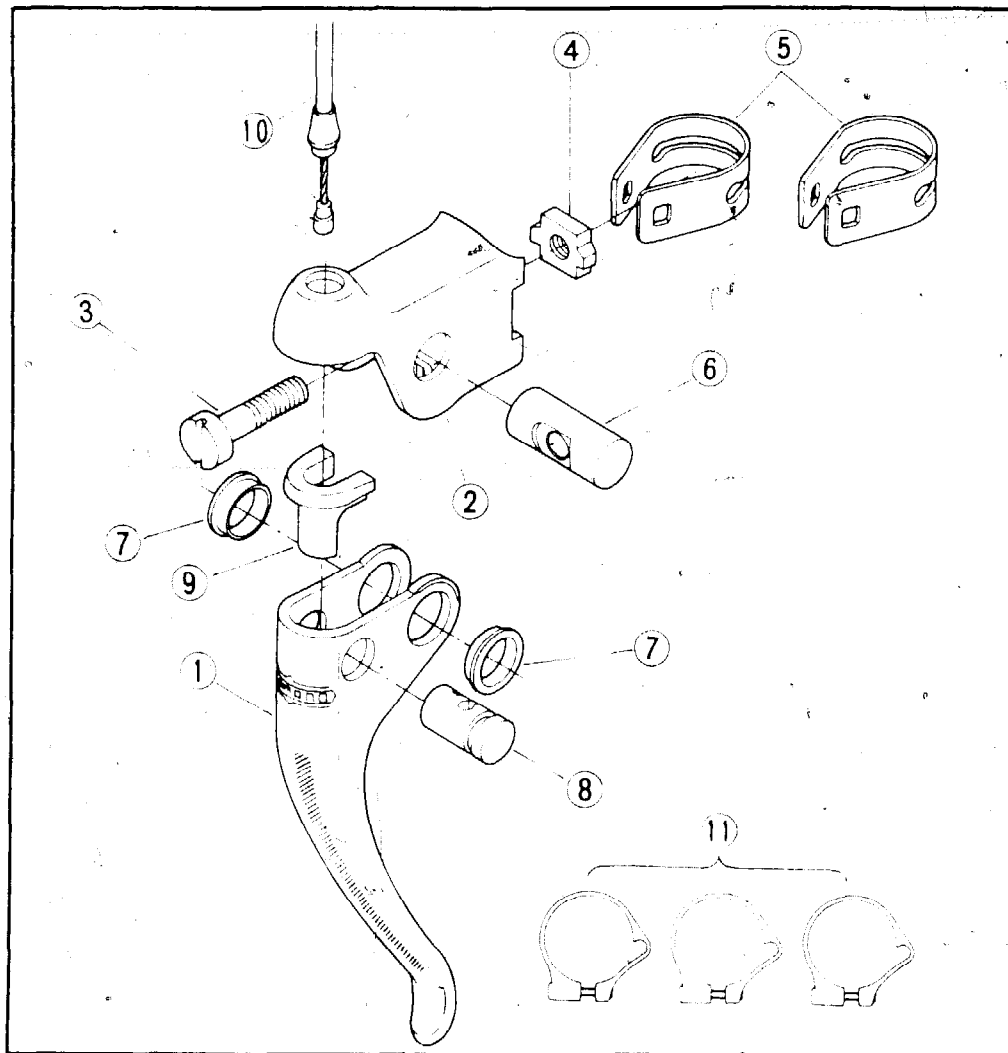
Shimano Model MB-100 brake lever. Parts are: (1) lever, (2) lever bracket, (3) pull up bolt, (4) pull up nut, (5) clamp, (6) pull up stud, (7) flanged thrust washer, (8) cable anchor stud, (9) lever adapter, (10) cable set and (11) outer band for one-inch tube.
